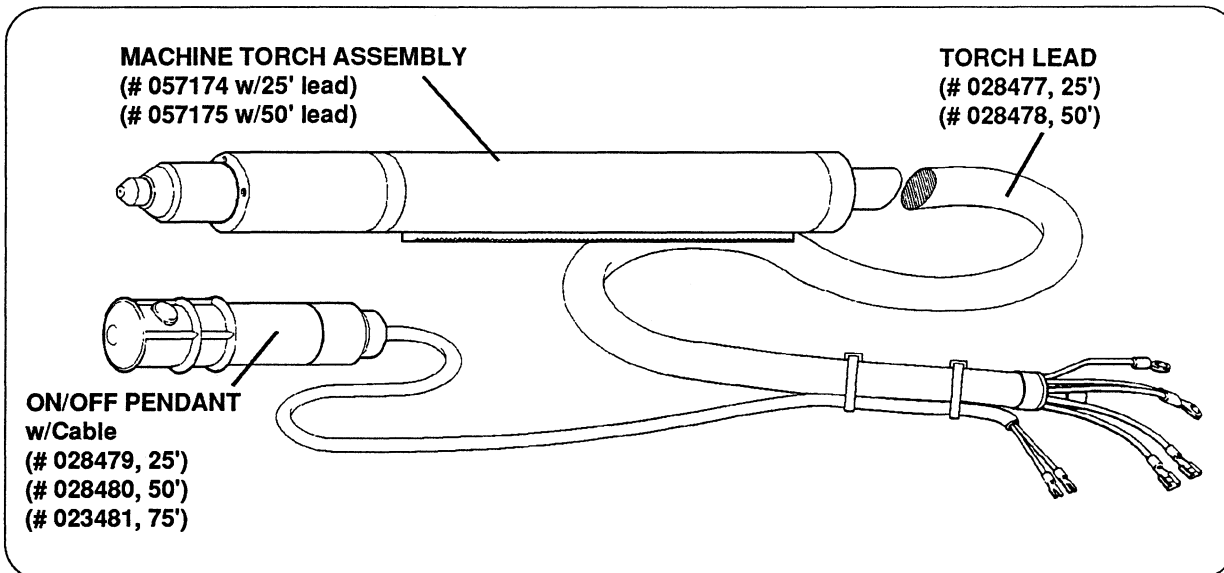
PAC121M Machine Torch Assembly, Leads and On/Off Pendant
